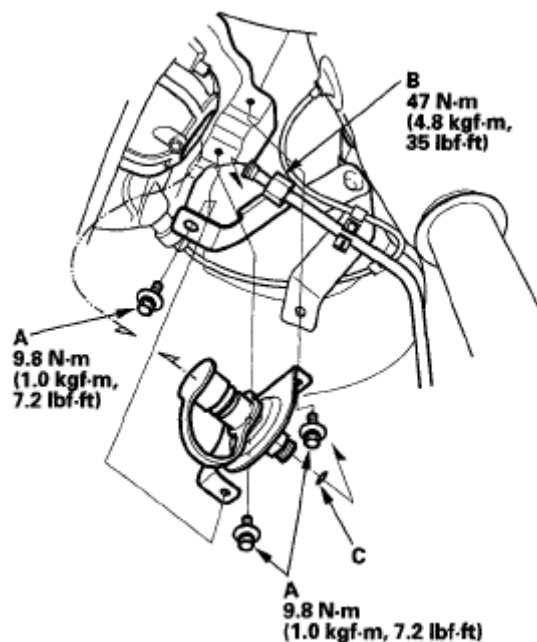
Identifying Fuel Fill Pipe, Bolts With Torque Specifications
